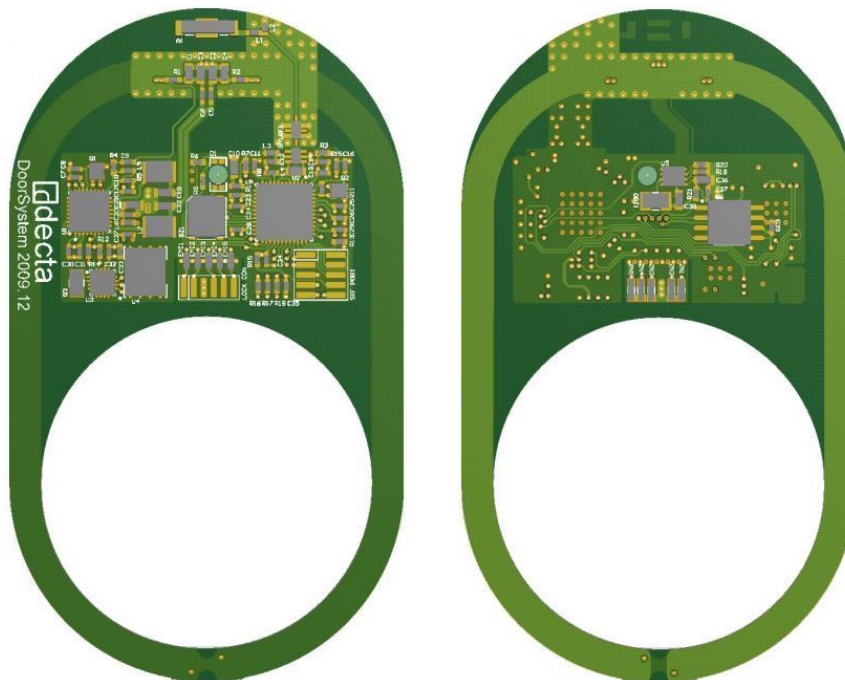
Production-Prototype Top and Bottom-Layer Layout
